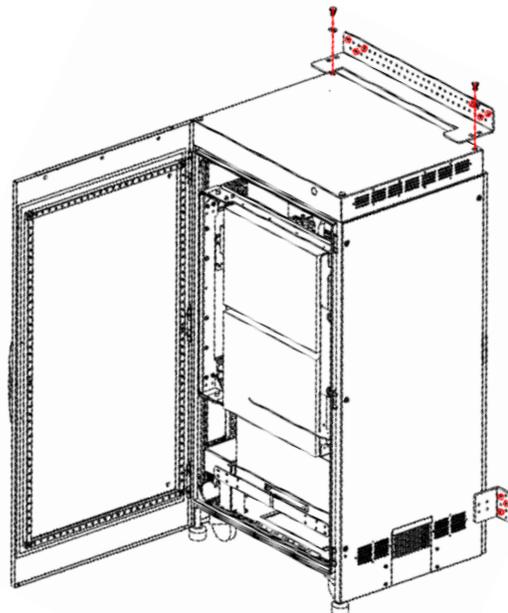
System Cabinet Wall-Mount Bracket
